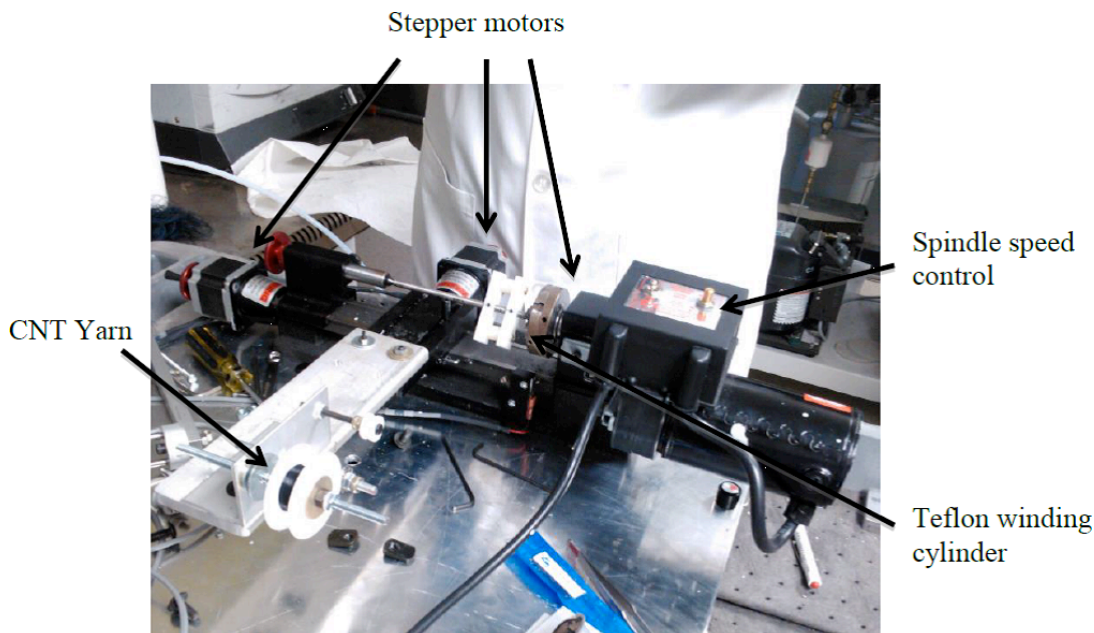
A tabletop CNC lathe based filament winder. Modifications to the lathe to enable filament winding included the mount for the CNT yarn spool.
